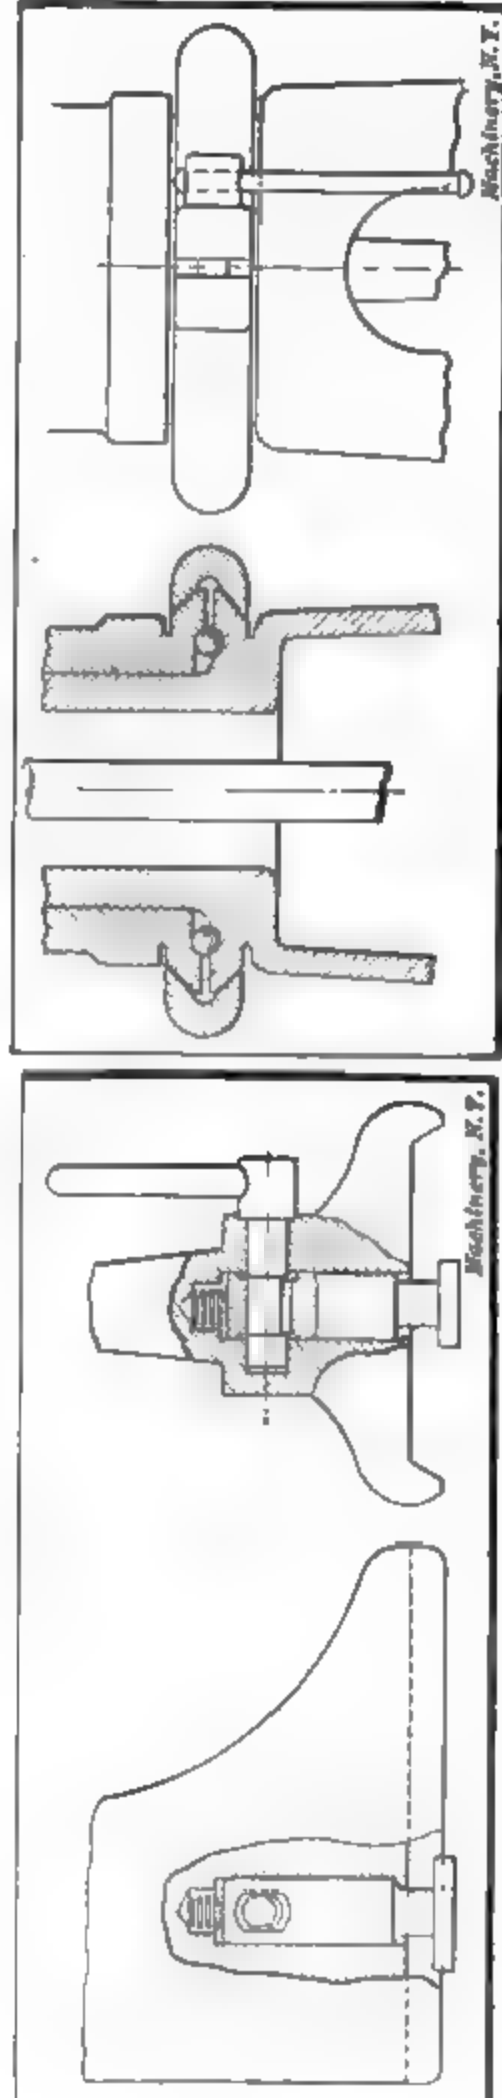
Eccentric Action Clamping Device used on Bench Lathes
